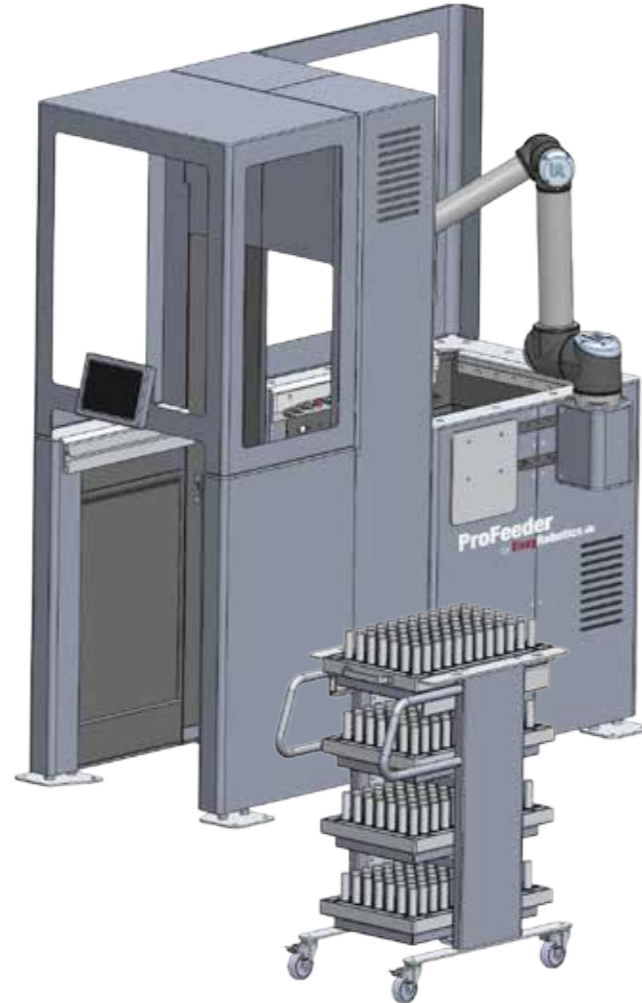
Flexible CNC feeder, robot (a) and magazine (b)
